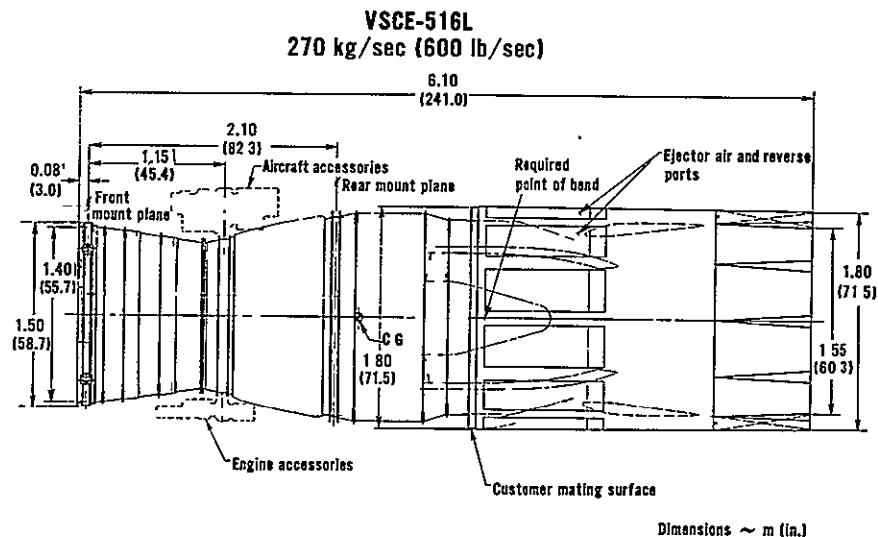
Lockheed Installation Drawing, VSCE-516L
